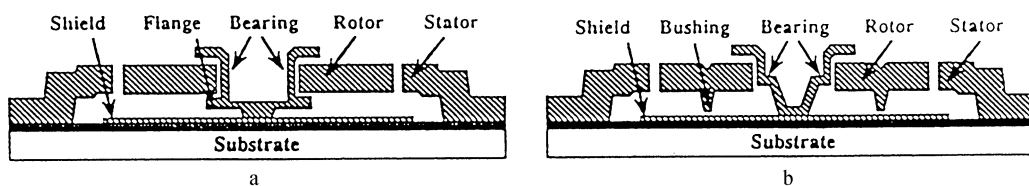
Cross-sectional schematic of flange a and center-pin b bearings of a micromotor
